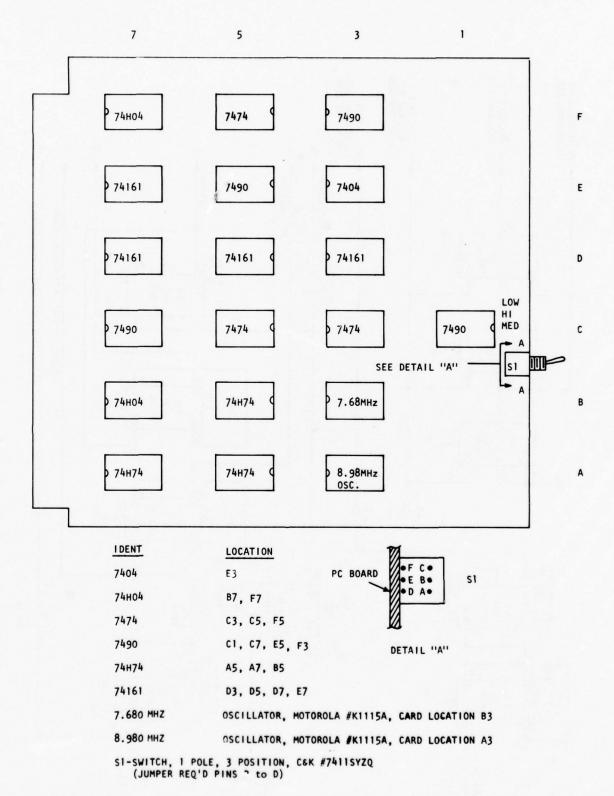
Clock Generator Board, Parts Layout Diagram and Parts List
